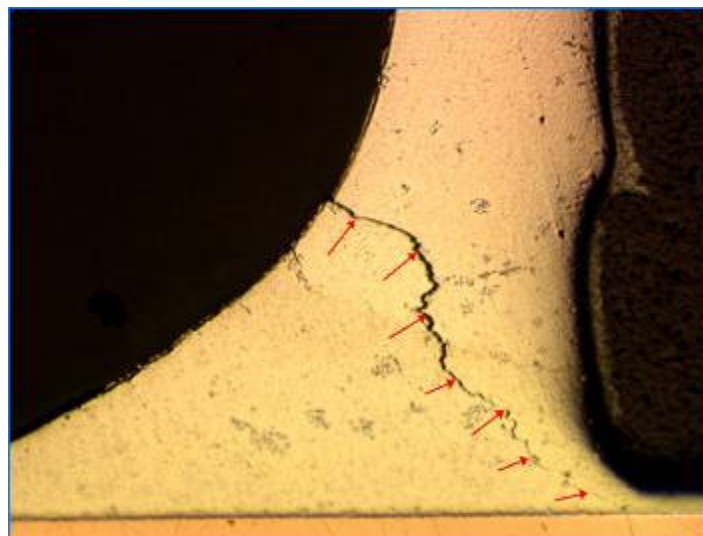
cross section, SN63, U52, left pad solder crack, 100x
